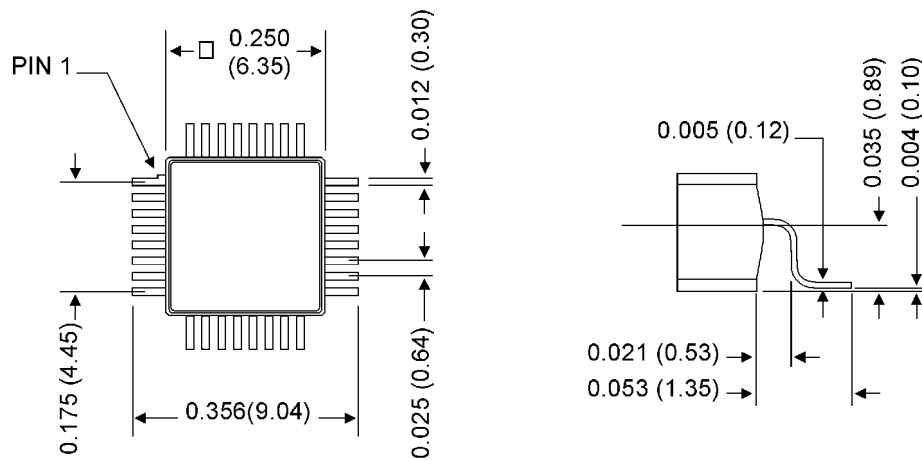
RDA012-QP package, dimensions shown in inches (mm).
